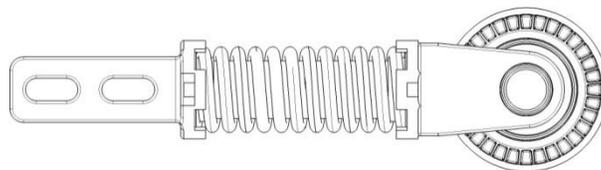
LINEAR MOTION LINEAR SPRING DESIGN
